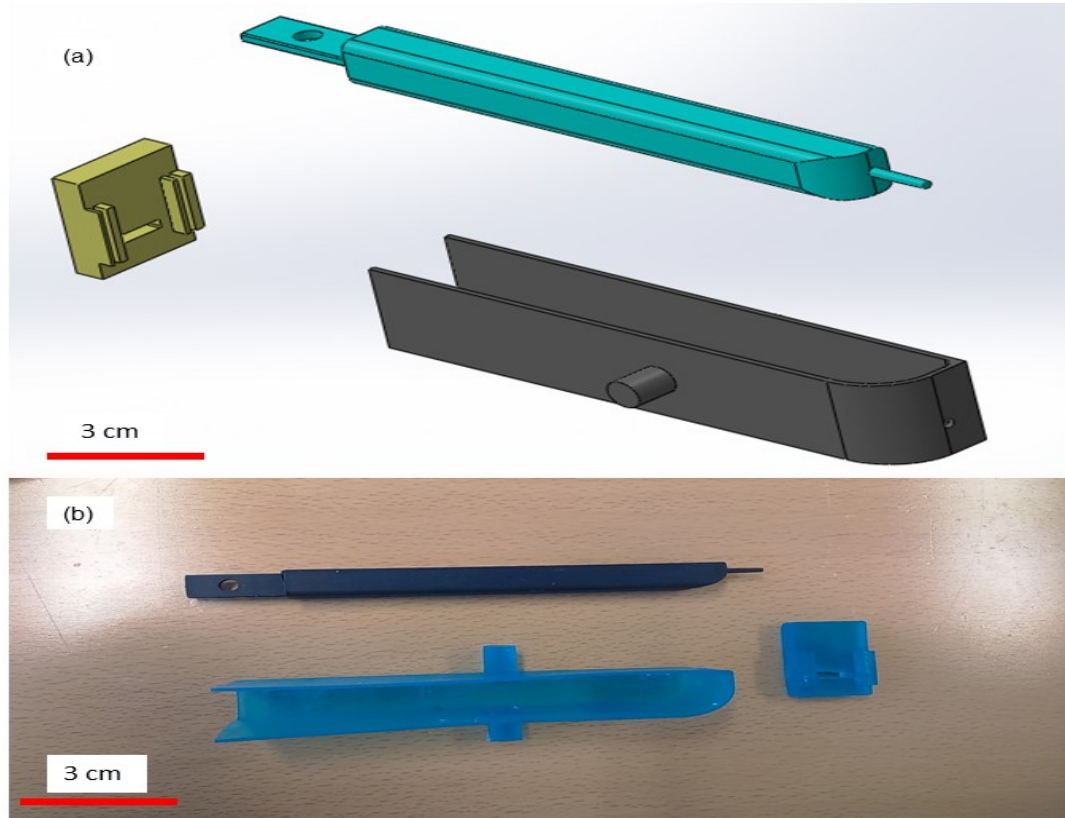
a) The CAD design of the three components of the mold to fabricate artificial skin of the finger. b) The 3D printed mold of finger skin
